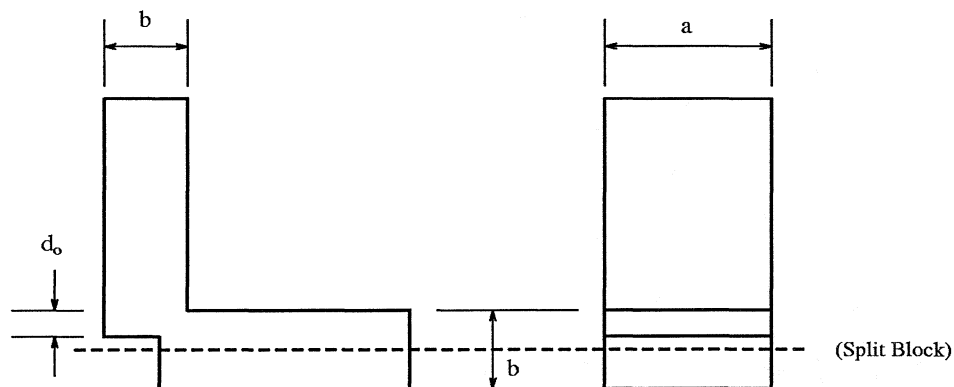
Single-Step Right-Angle E-Plane Bend Geometry.
